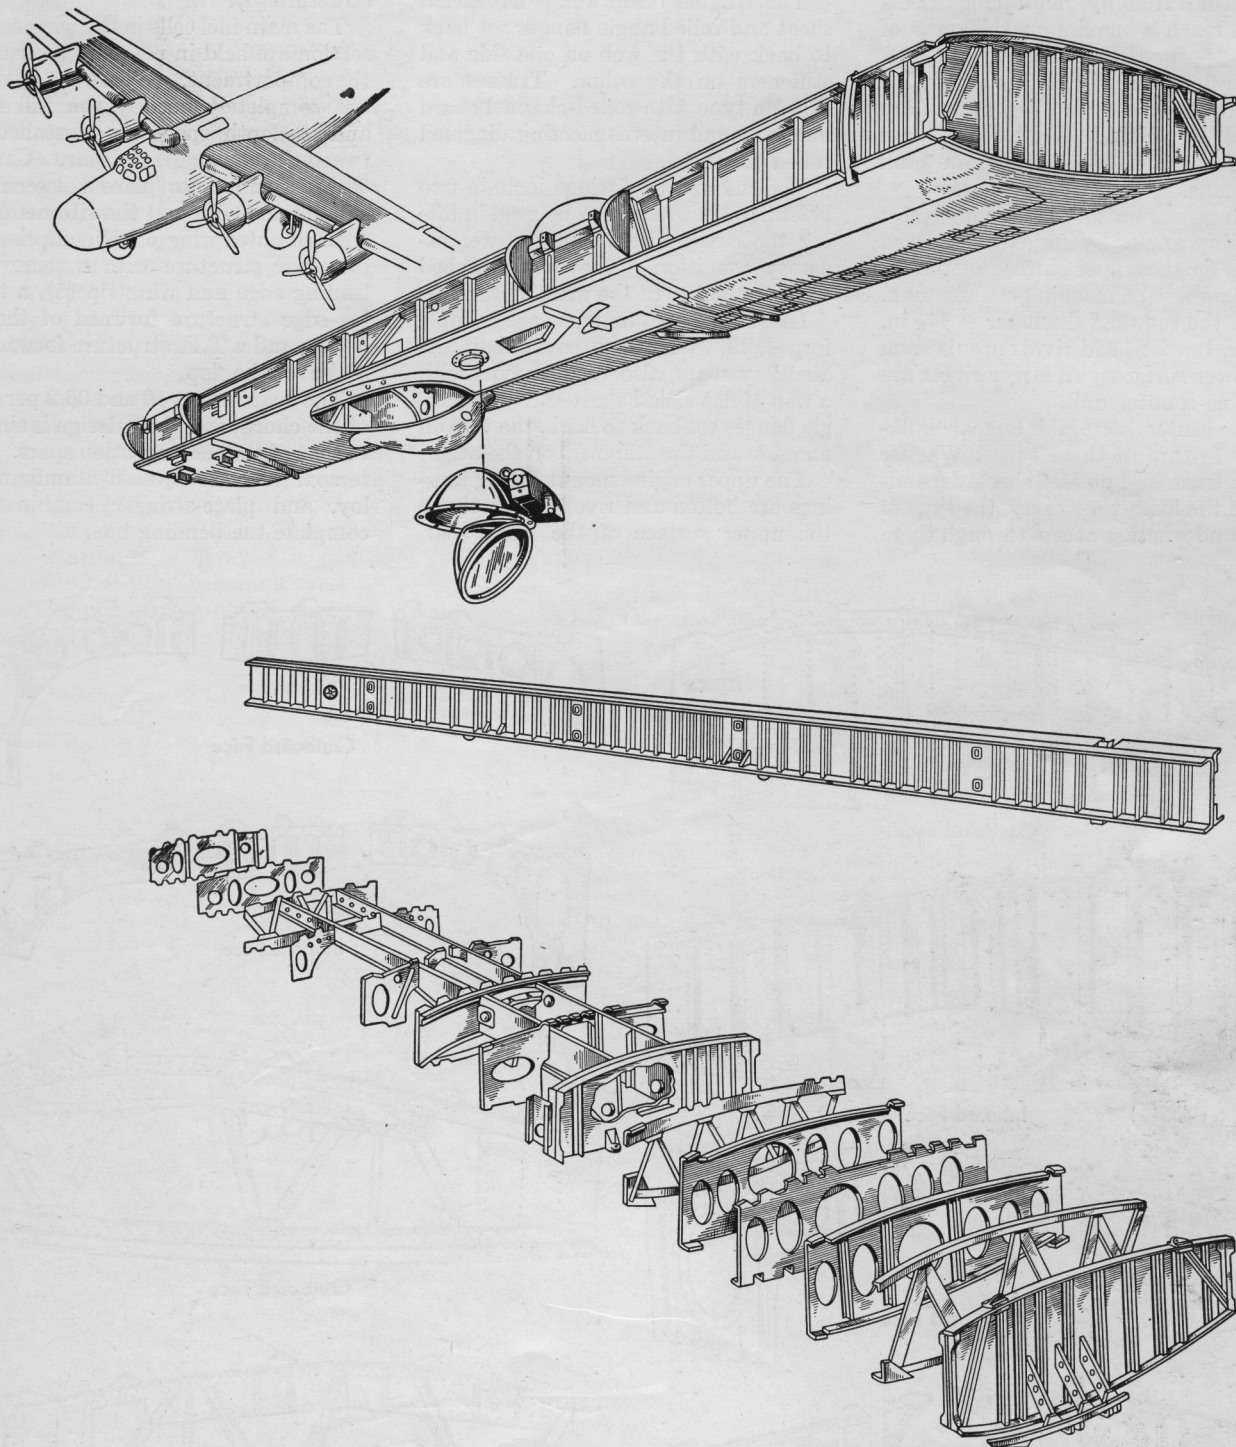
The center section wing assembly showing structural details of the bulkheads and spars.
